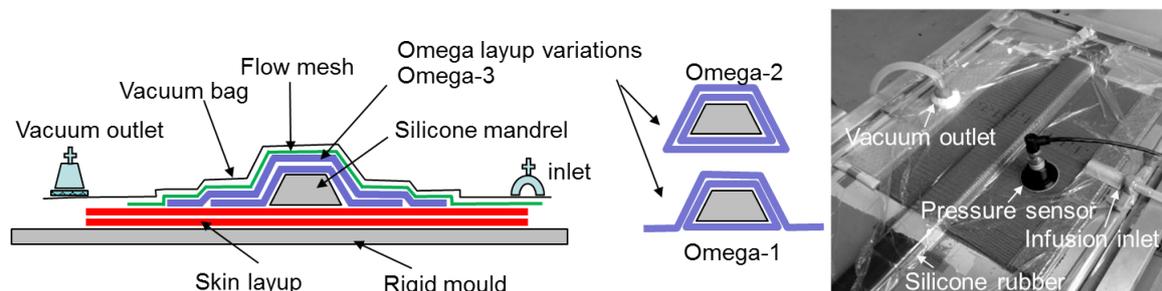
Sketch (Left) and actual setup (Right) of vacuum assisted resin transfer moulding for manufacturing Omega beam 1, 2 and 3
